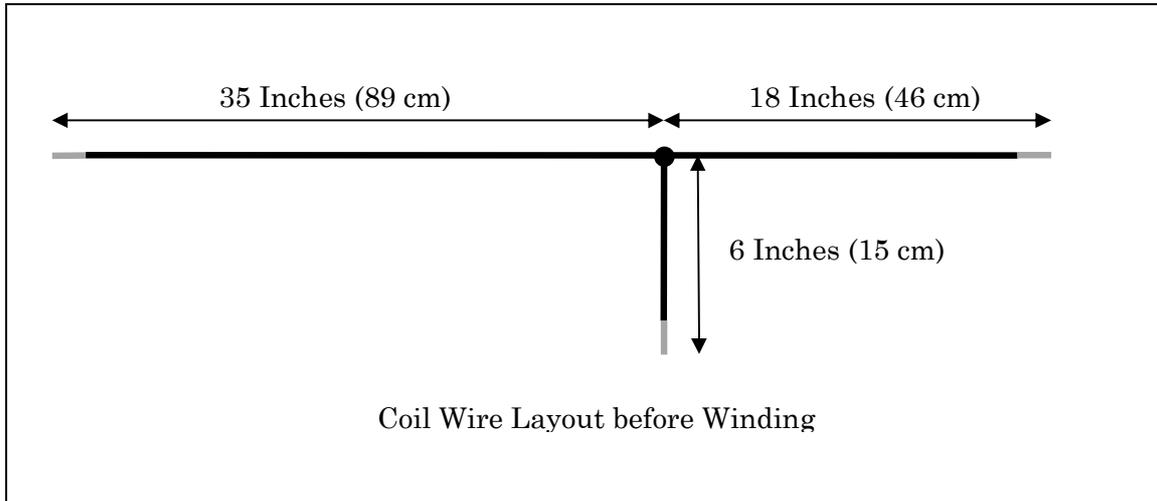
Details of wire assembly for the coil before winding. Build this assembly first, and then wind it onto the drilled coil bobbin.
